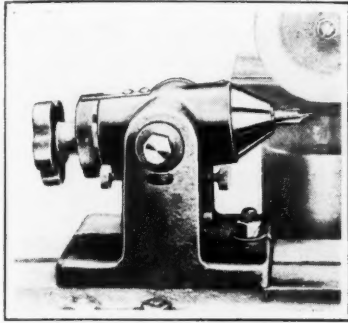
Grinding the Flutes of Gear-tooth Chamfering Cutters
